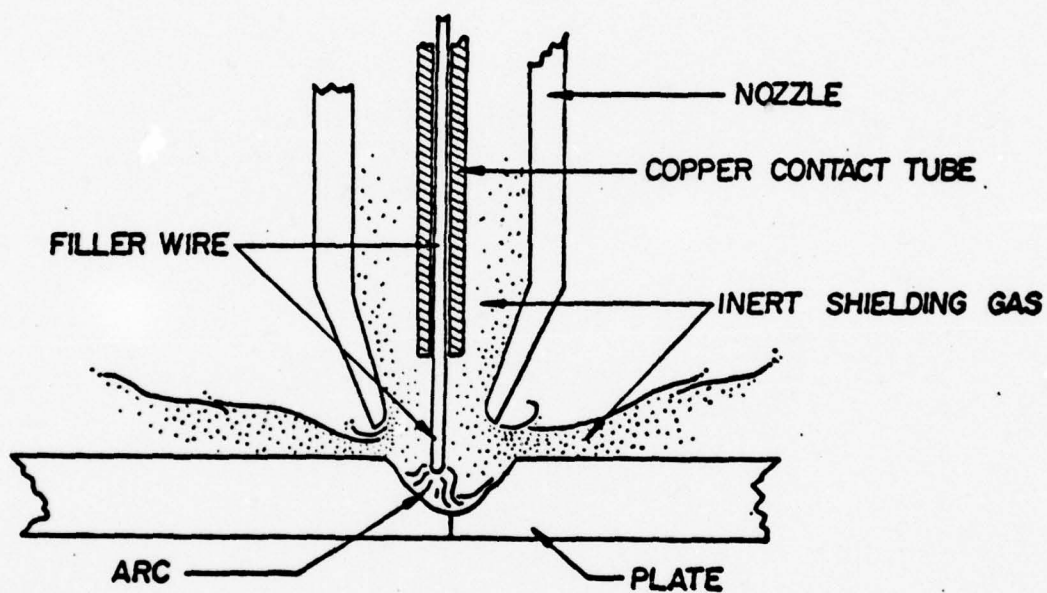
Schematic of a MIG "gun" nozzle arrangement. The nozzle directs inert shielding gas to the weld joint. The copper contact tube completes the electrical circuit to the filler wire thereby allowing initiation and maintenance of the welding arc between the filler wire and the plate to be welded.
